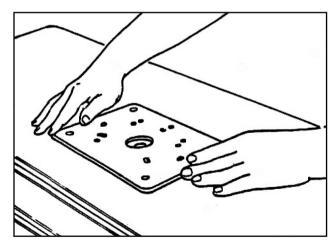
Make sure table plate is properly set into the table opening. The top of the table plate should be flush with the top of the table.
